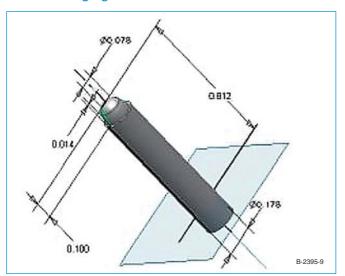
Dimensions and shape for the diaphragm dimpling die. The die drawn here was lathed from an aluminum rod. A soldering iron tip of the proper radius with the tip rounded will work as well. It is suggested to make a shallow groove to mark dimpling depth.
